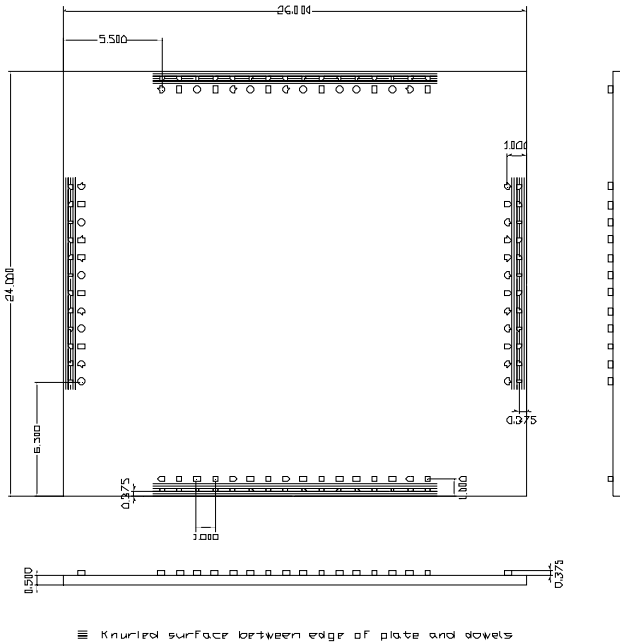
Mechanical drawing of the laminate lay-up and cure tooling apparatus (all dimensions in inches).
